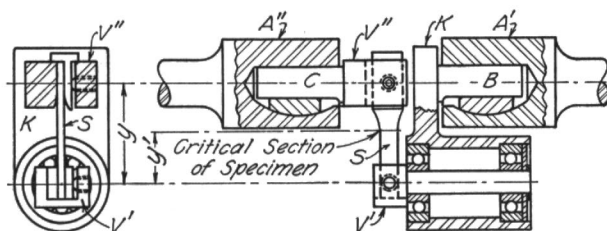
ATTACHMENT TO REPEATED-TORSION FATIGUE TESTING MACHINE FOR MAKING REPEATED-BENDING TESTS
